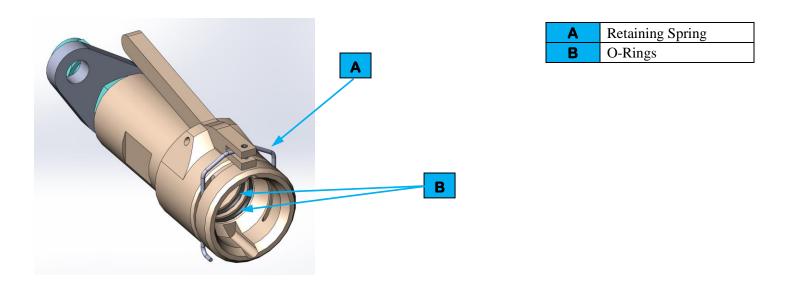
BEV3 Inlet Coolant Connector O-Rings and Retaining Spring
